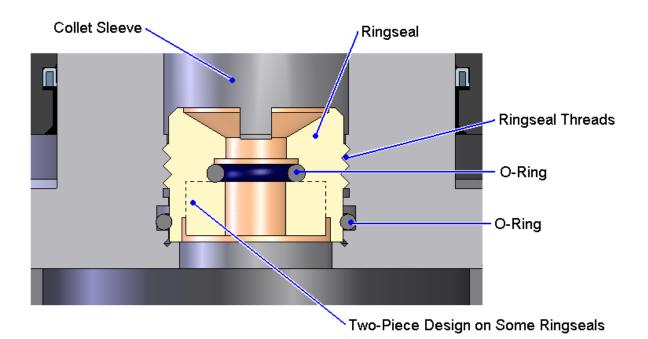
Cross-section View of Ringseal Showing Both O-rings
